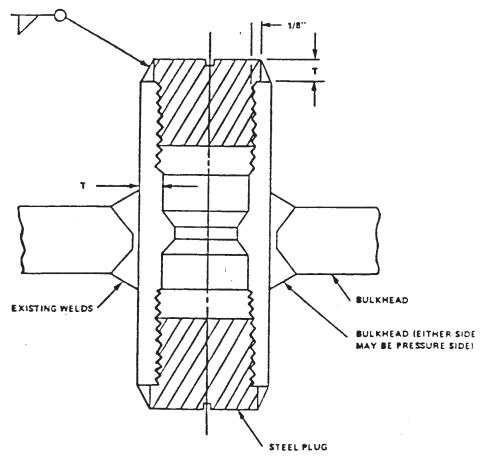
Closure and Seal Welding of Threaded Stuffing Box
